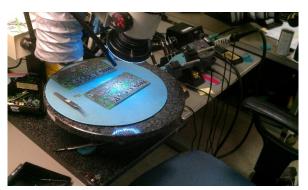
Components being soldered on to circuit board at Noca workshop
